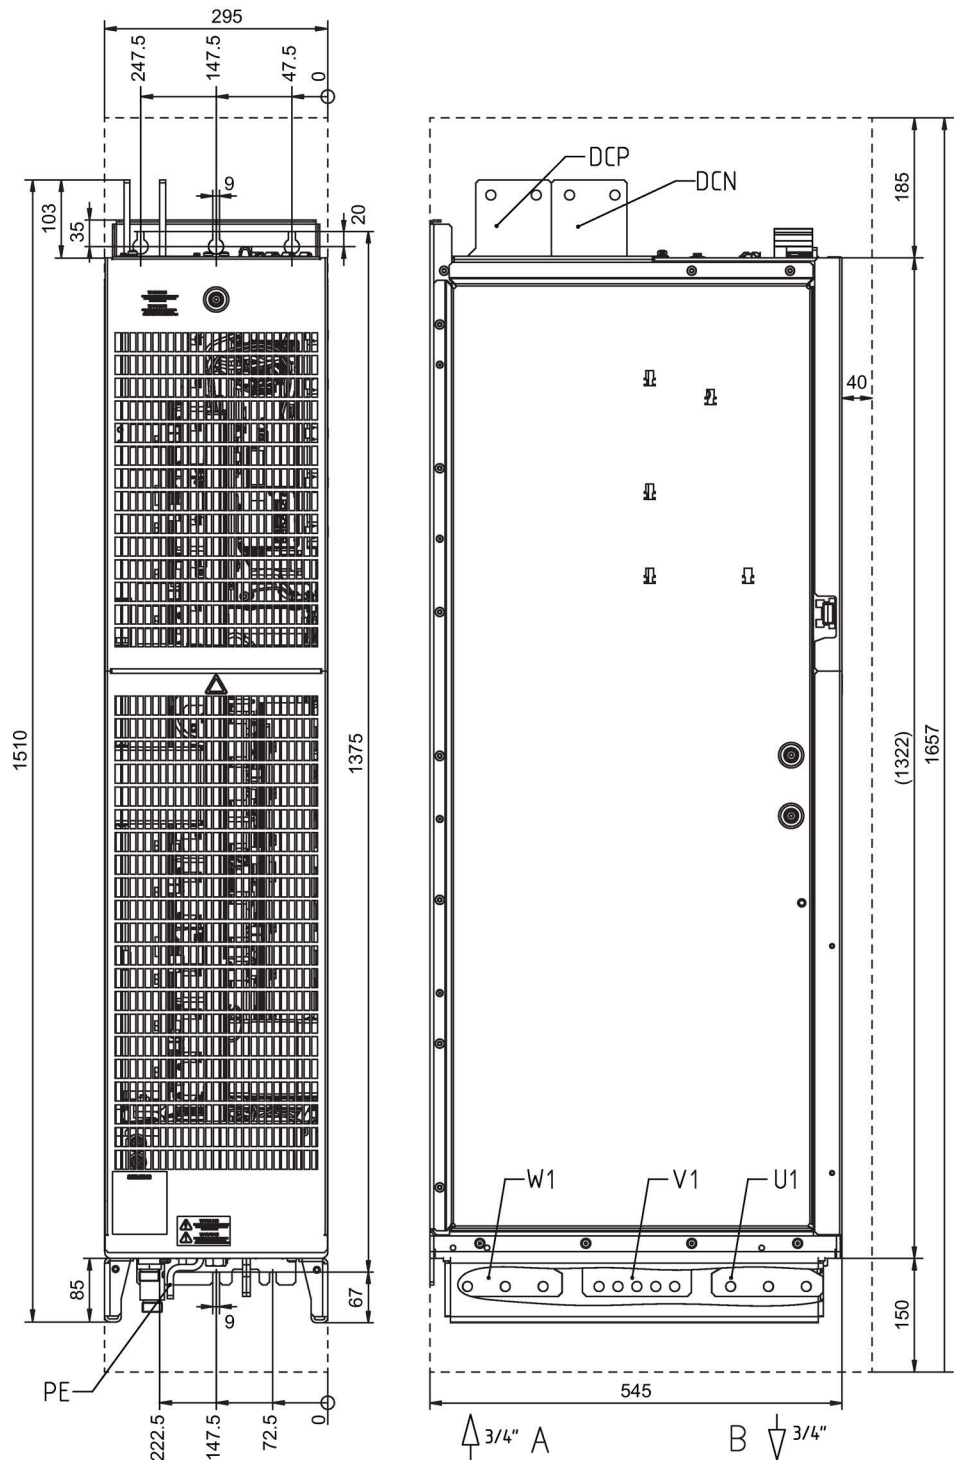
Dimension drawing, Active Line Module, frame size JXL, article number 6SL3335-7TG41-6AA7. Front view, side view
